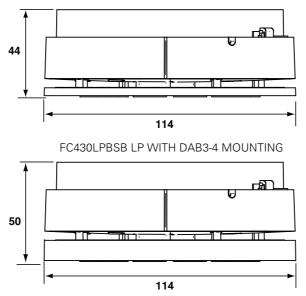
FC430LPBSB LP Beacon-Sounder with Mounting Flange—Overall Dimensions
